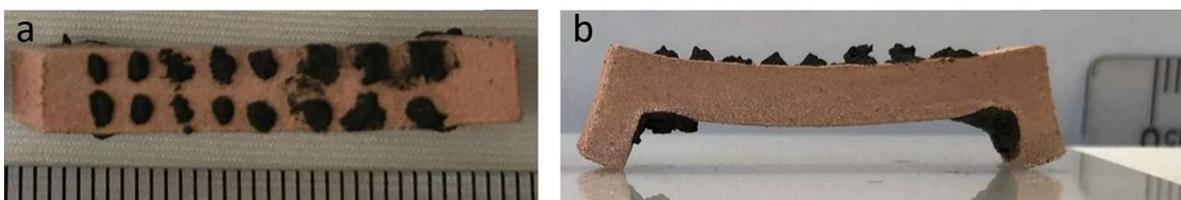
A dotted patterned coating with SRSC-Cu coating show to overcome part sag during sintering (a) top view (b) side view. (Note: 1 div = 1 mm on the ruler)
